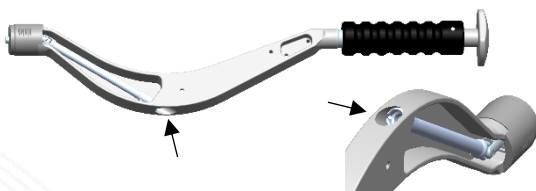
The *Hip shell* is assembled and disassembled on the curved *Shell impactor* by using a hex *Screwdriver*. Firmly operate screw of the curved *Shell impactor* at the arrow-marked location
